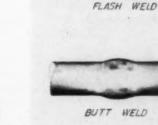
Right—Typical flash-butt and upset-butt welds
